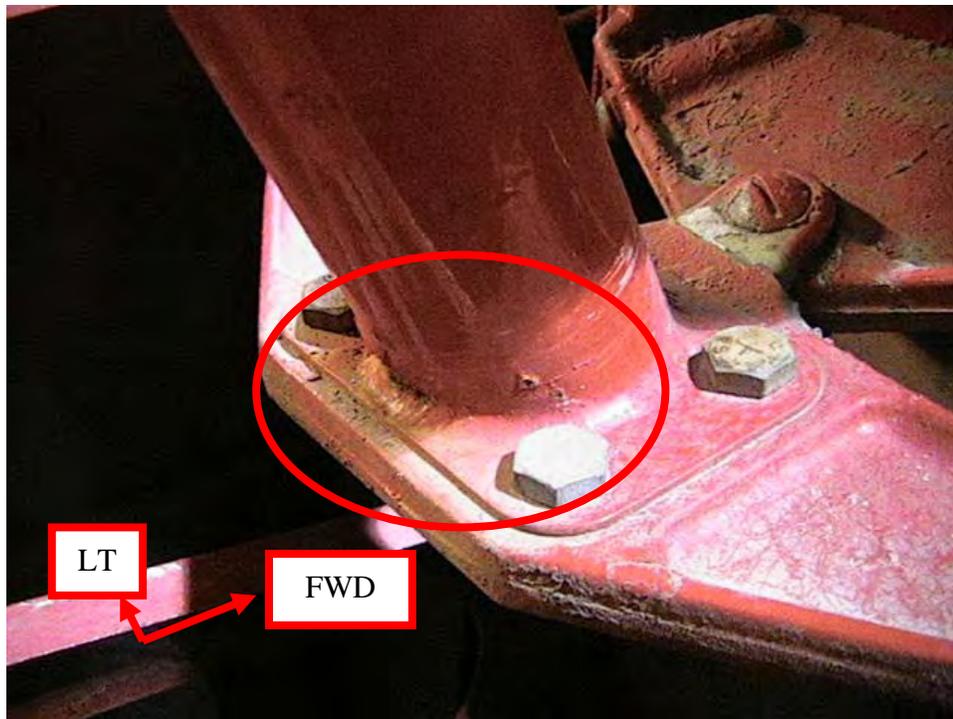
Corrosion on the Rudder Torque Tube FS 342.25, WL 20, and BL 0
